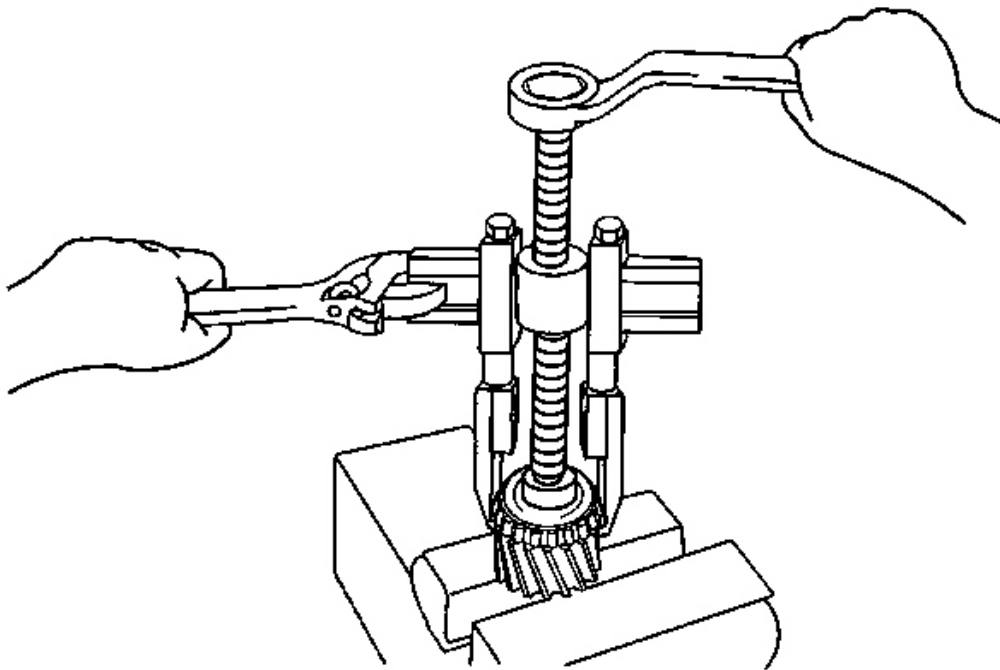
Removing Outer & Tapered Roller Bearing Race Using A Puller
